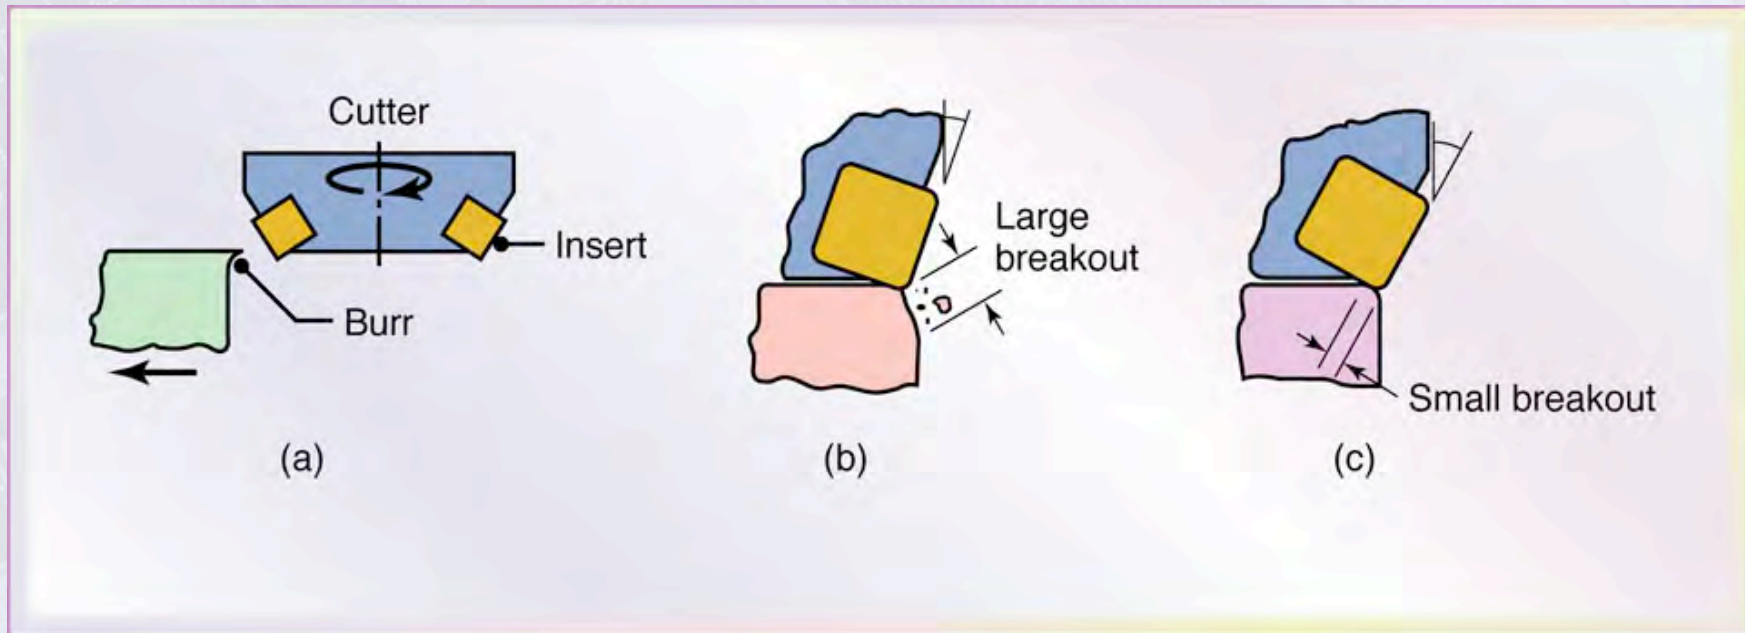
Edge defects in face milling: (a) burr formation along workpiece edge, (b) breakout along workpiece edge, and (c) how it can be avoided by increasing the lead angle (see also last row in Table 24.4).
